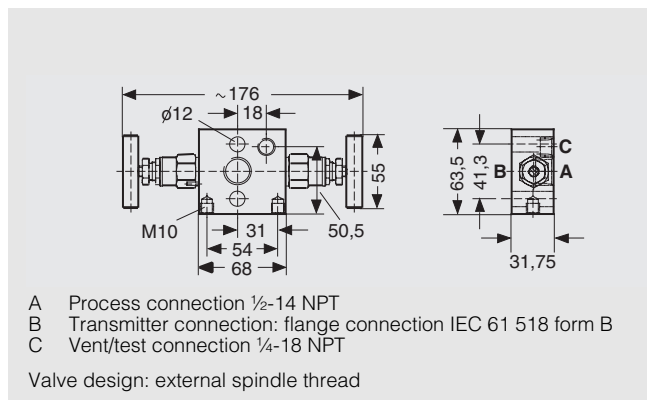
/80 Two-spindle valve manifold DN 5, dimensions
